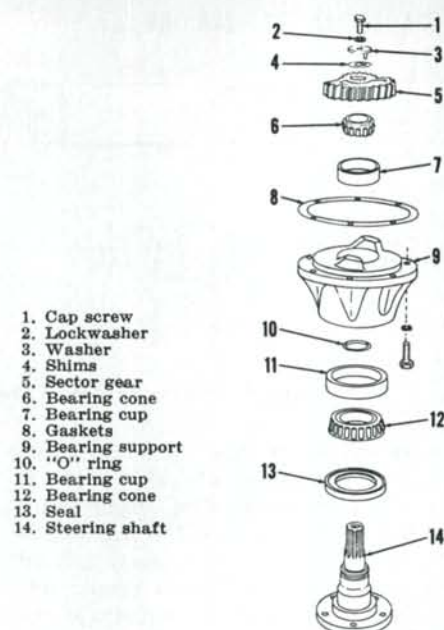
On single front wheel tricycle models, above parts are used in steering gear instead of items 53 through 62 shown in Fig. 13. Mark on hub of sector gear (5) must be aligned with punch mark on top of sector shaft (14).
